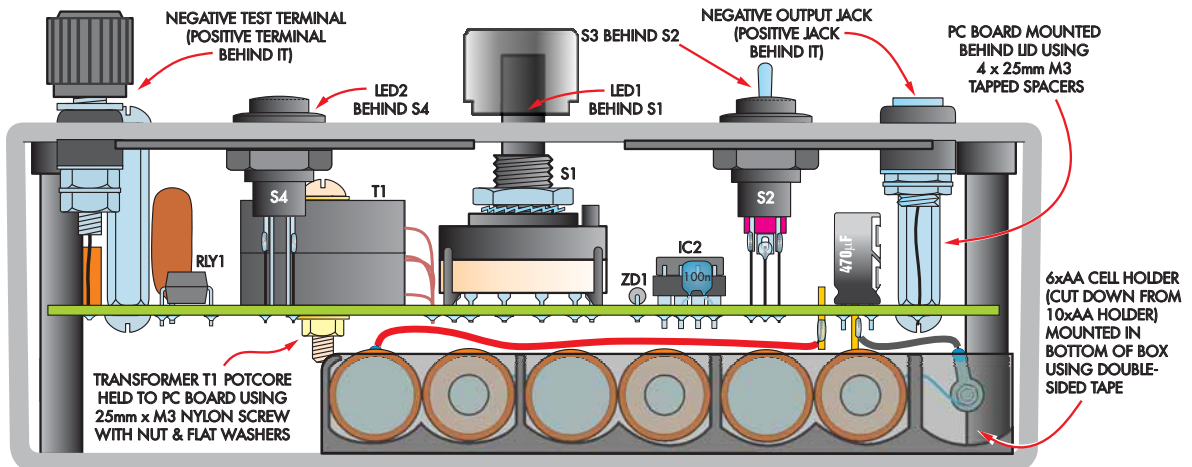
a side-on view 'through' the wall of the UB1-size box, showing how everything goes together. The 6xAA cell holder must be mounted at one end, as shown here, to avoid fouling the screw holding the transformer to the PC board.
